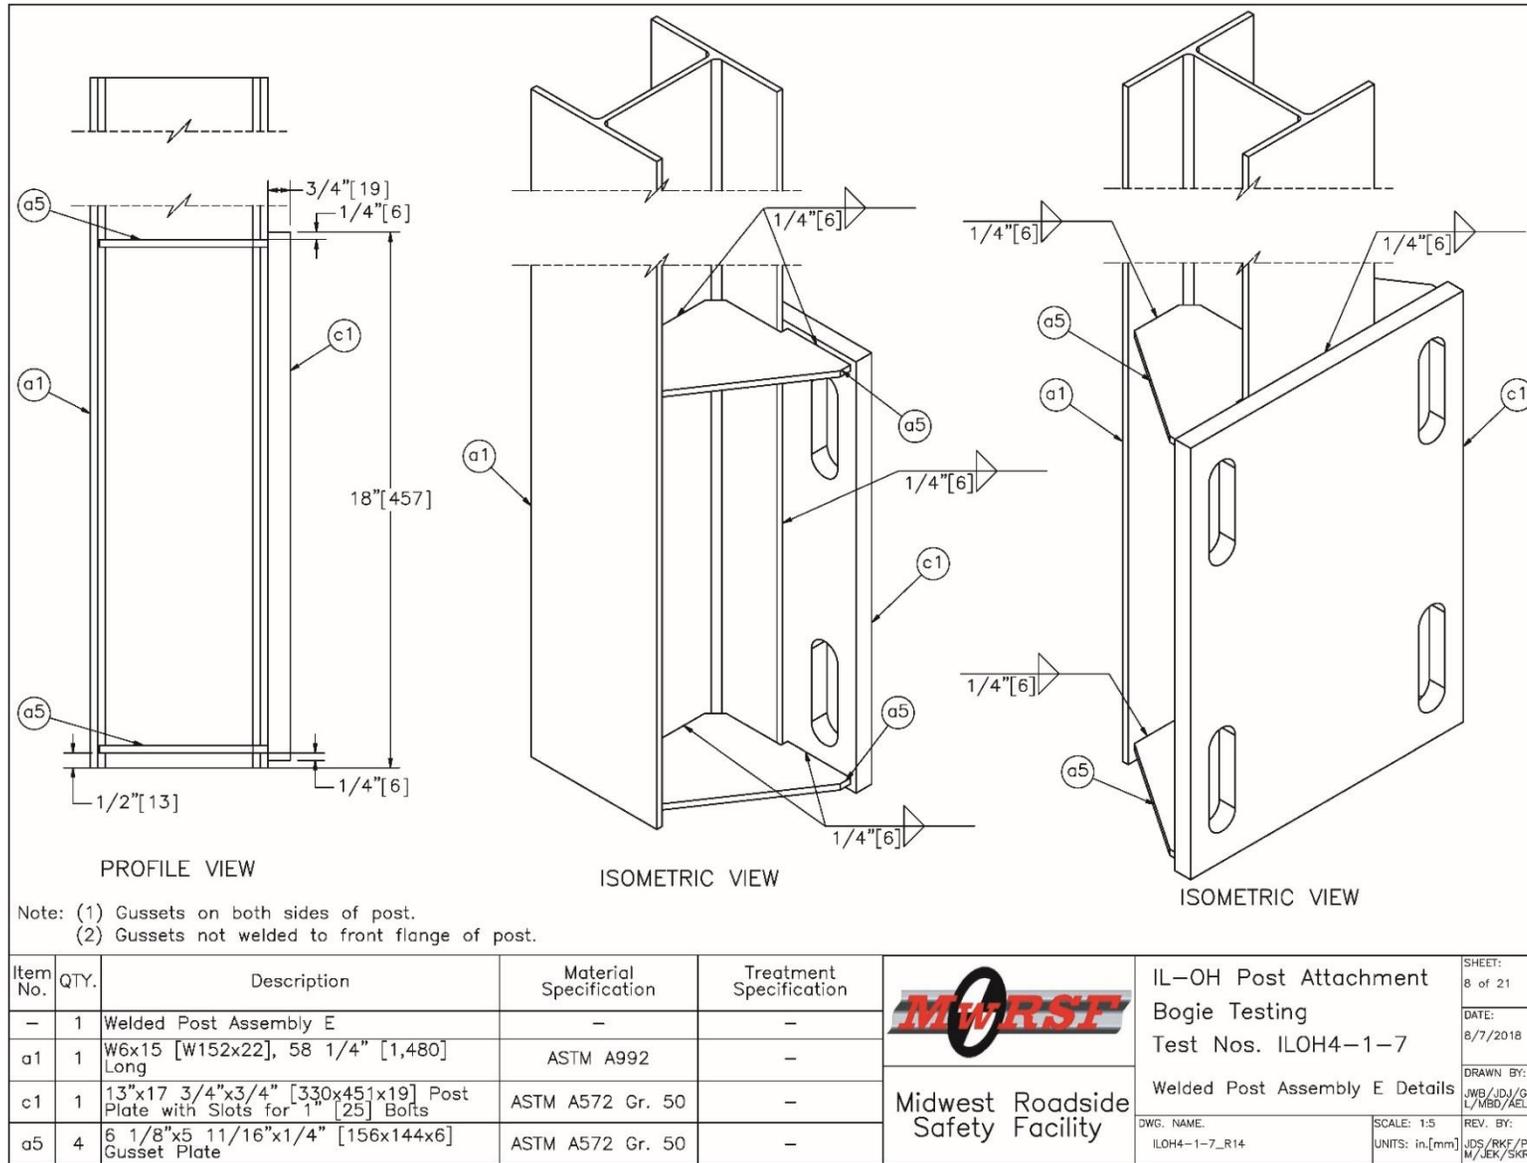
Welded Post Assembly E Details, Test No. ILOH4-7
